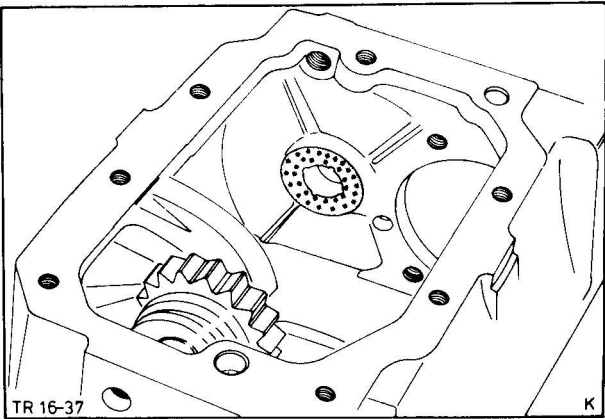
Stick thrust washers of countershaft gear train to gearbox casing
